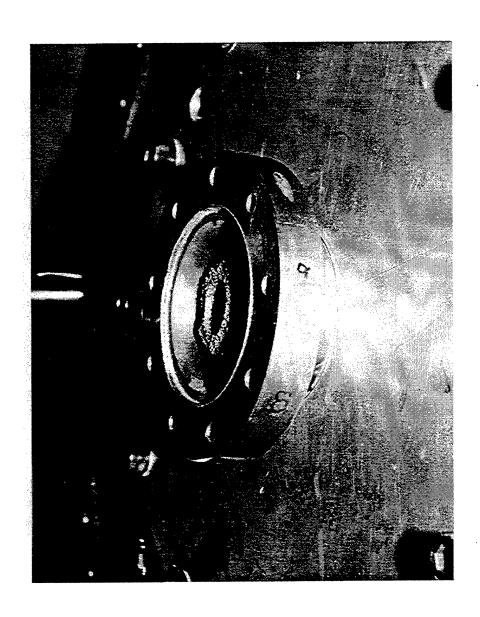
High speed jackshaft at driveshaft assembly interface.
